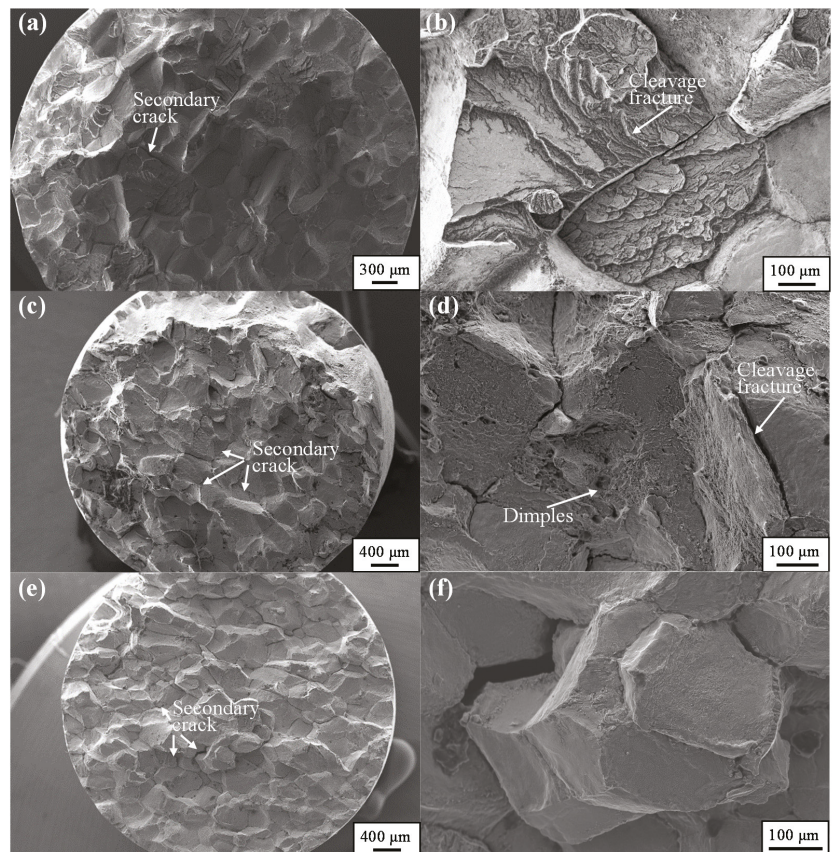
Fracture surfaces of post-test specimens at (a,b) RT, (c,d) 550 °C, and (e,f) 650 °C.
